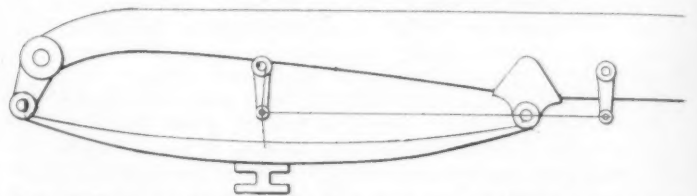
LAYOUT DESIGNED TO COMPENSATE FOR SPRING DEFLECTION
